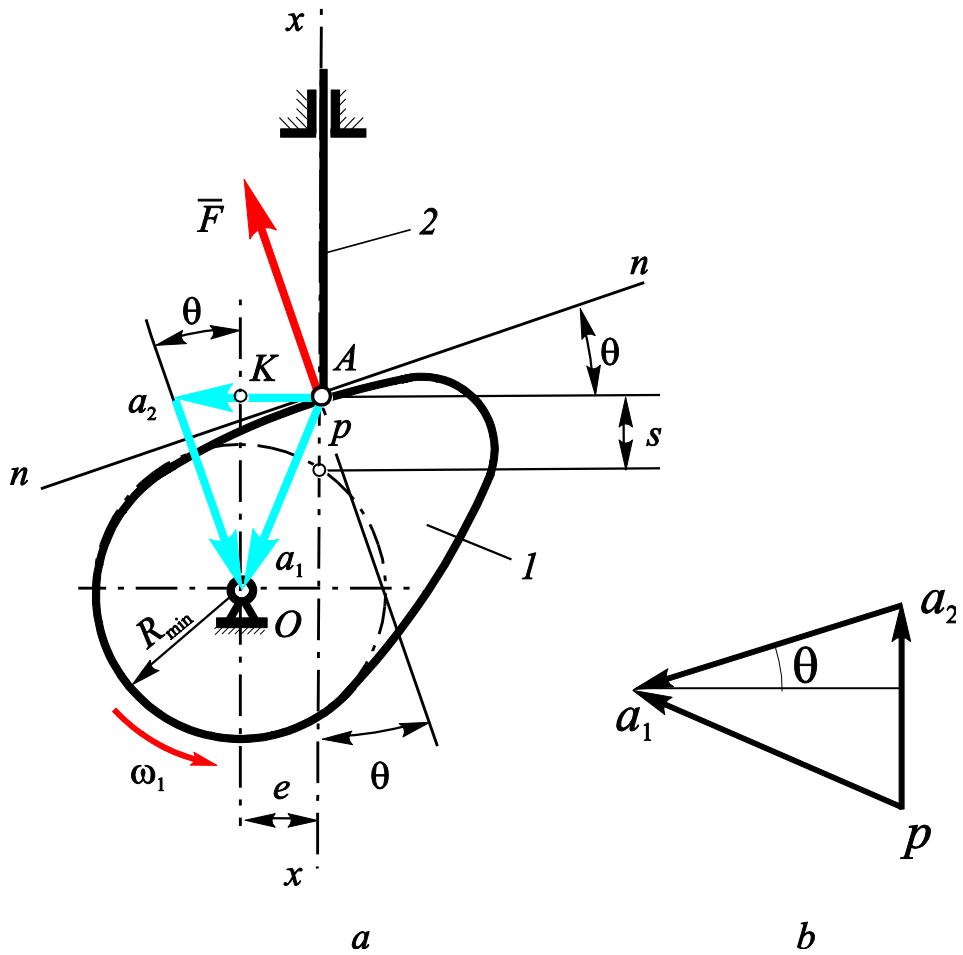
Cam with offset pointed follower: *a* – kinematic scheme;
